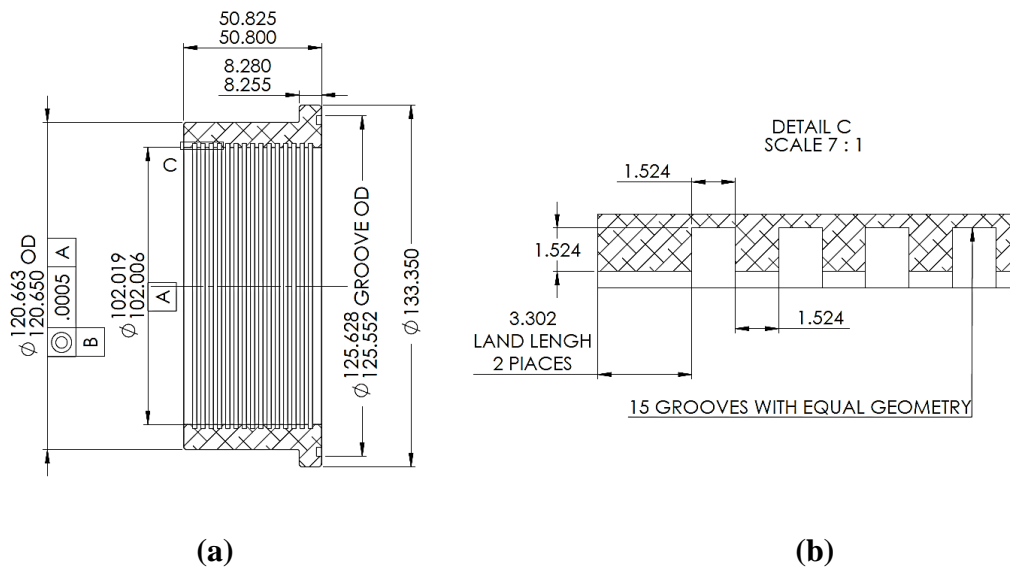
(a) Grooved seal geometry. (b) Grooves details. All dimensions are in mm.
